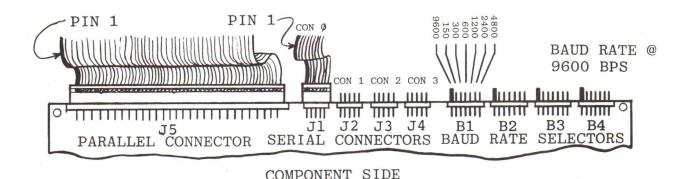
M/NET I/O CABLE LOCATIONS
